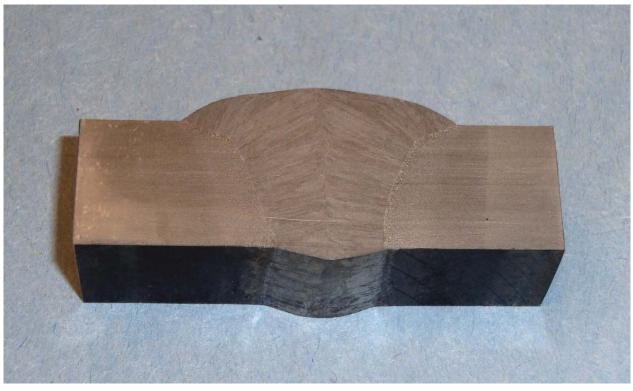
Sample Macro, ¹/2" OS Weld Procedure
